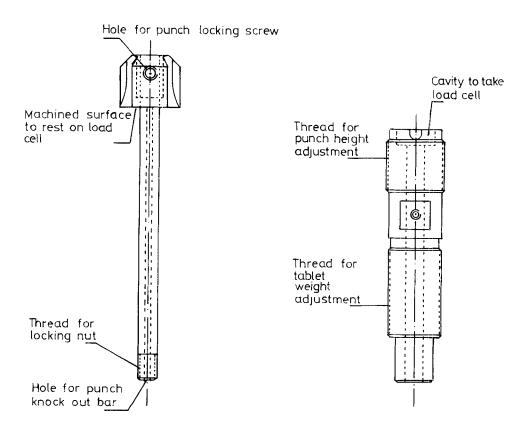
LOWER PUNCH CARRIER MODIFICATIONS
